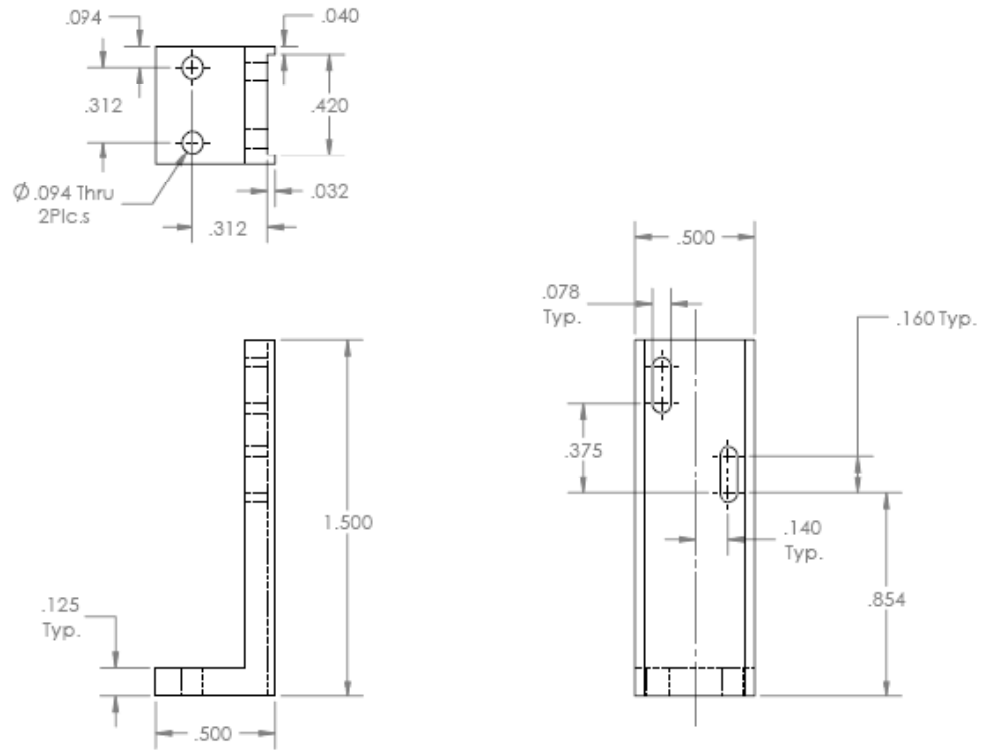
CAD drawing of the fixture holding the solenoid actuator.
